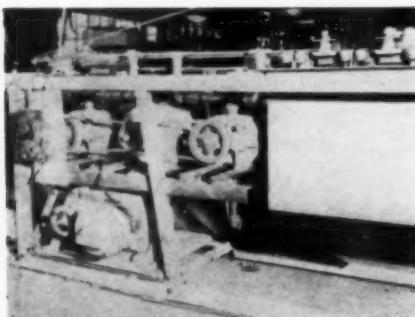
Moisture removing section of zipper plating machine, placed in tail-end (left foreground of Fig. 2)
